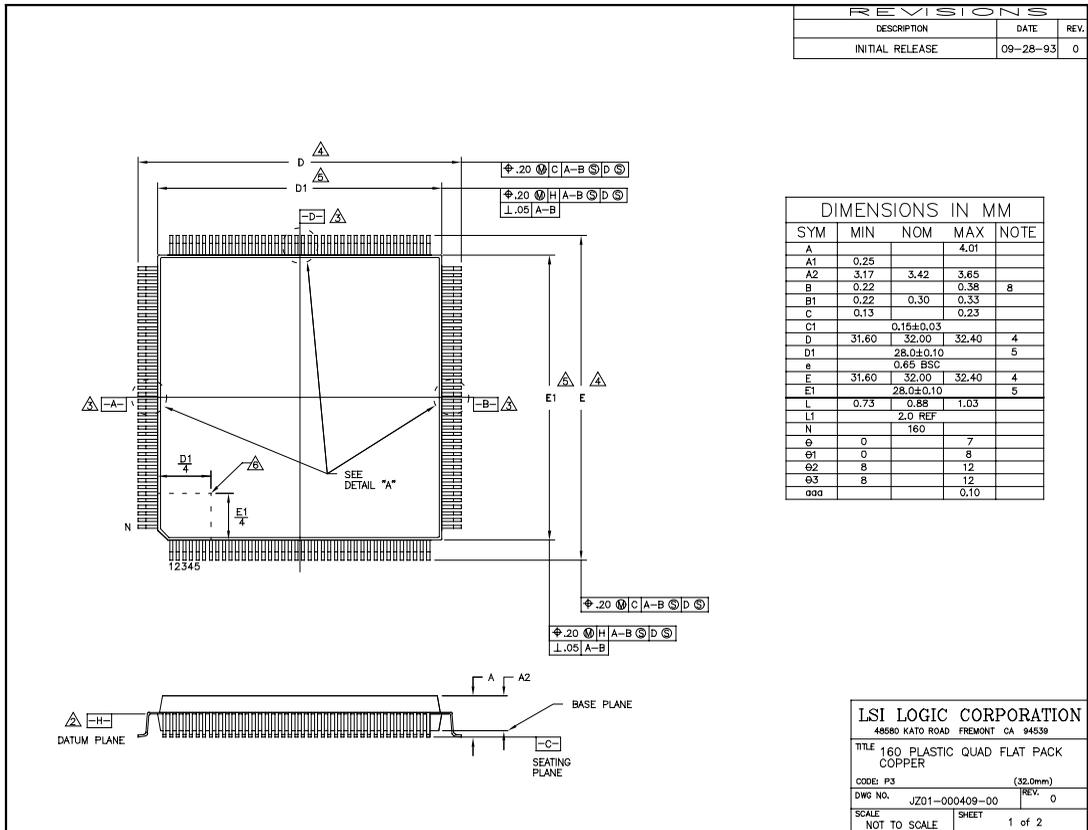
is the 169-pin PBGA mechanical drawing and Figure 7.37 is the 160-pin PQFP mechanical drawing for the LSI53C875.
